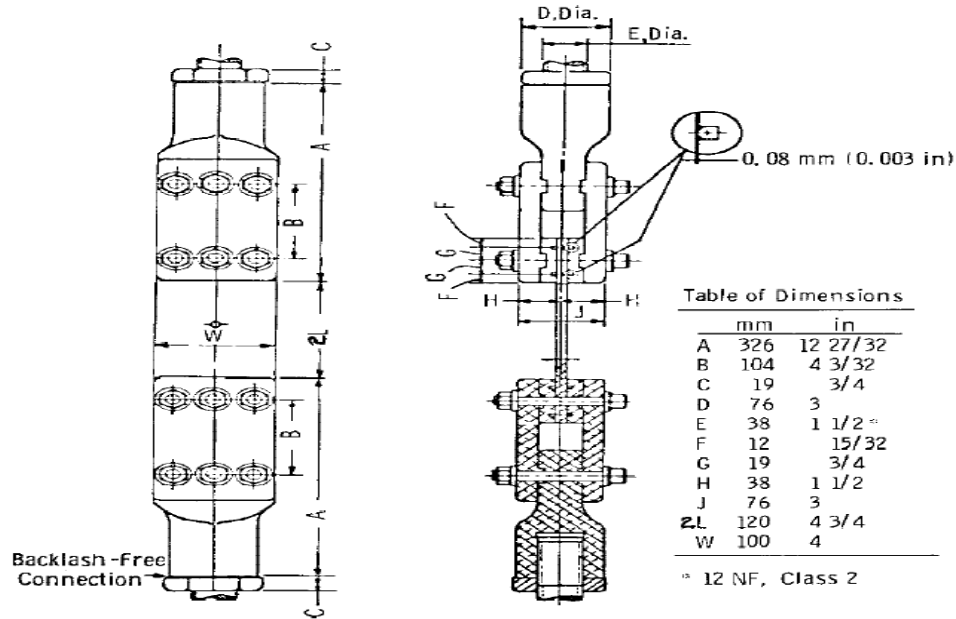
Bolt and Keyway Assembly for Gripping 100mm wide M(T) Specimen [133].
